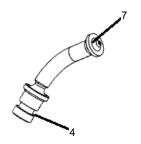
Fuel Injector Tube O-Ring locations (7) & (4)
